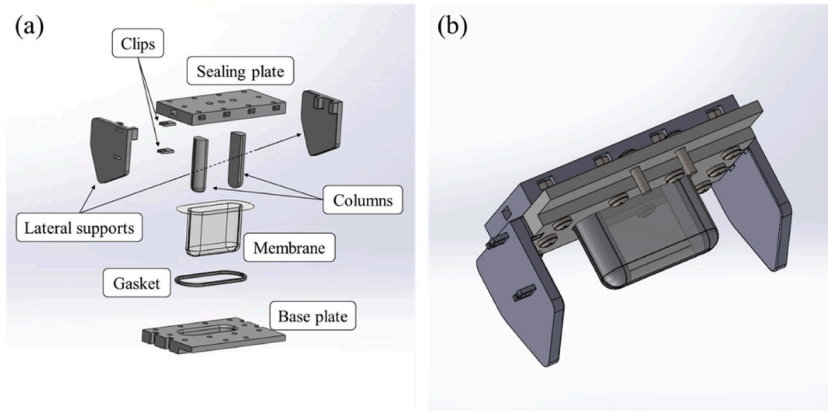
CAD model of the tank. Exploded view of the tank system (a) and the assembled tank (b).
